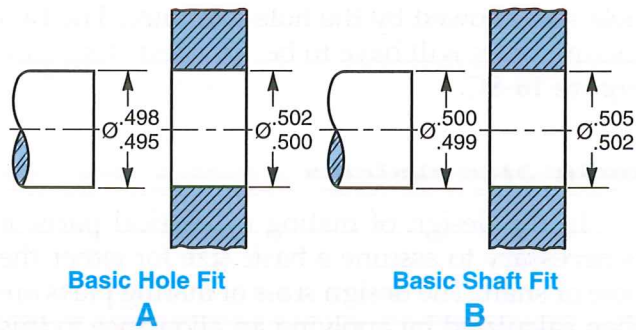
Design examples using the basic hole size and basic shaft size systems. A—In the basic hole size system, the size of the hole is the design size. Allowances are applied to the size of the shaft during the design phase. B—In the basic shaft size system, the size of the shaft is the design size and allowances are applied to the hole size during the design phase.
